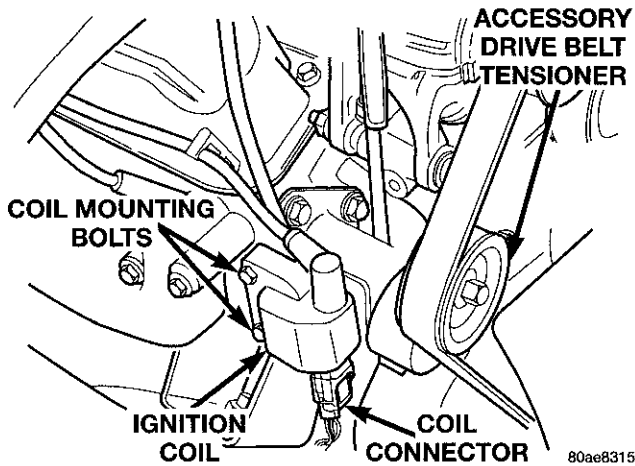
Ignition Coil—3.9L V-6 or 5.2/5.9L V-8 LDC-Gas Engines
